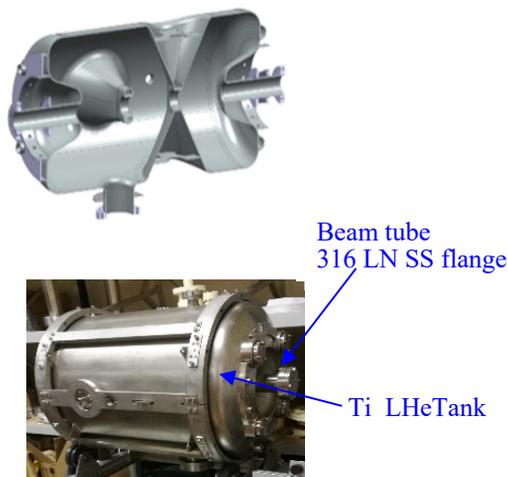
Drawing (A) and photograph (B) of a prototype Double-Spoke cavity for ESS.
